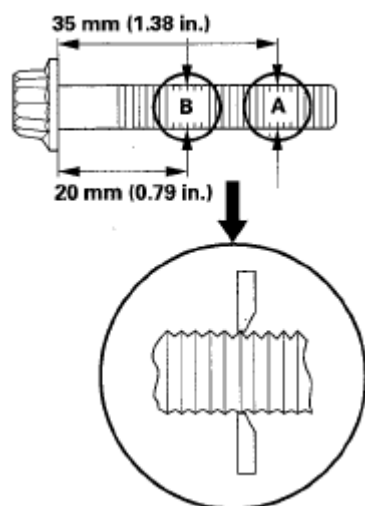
Identifying Diameter Of Connecting Rod Bolt
